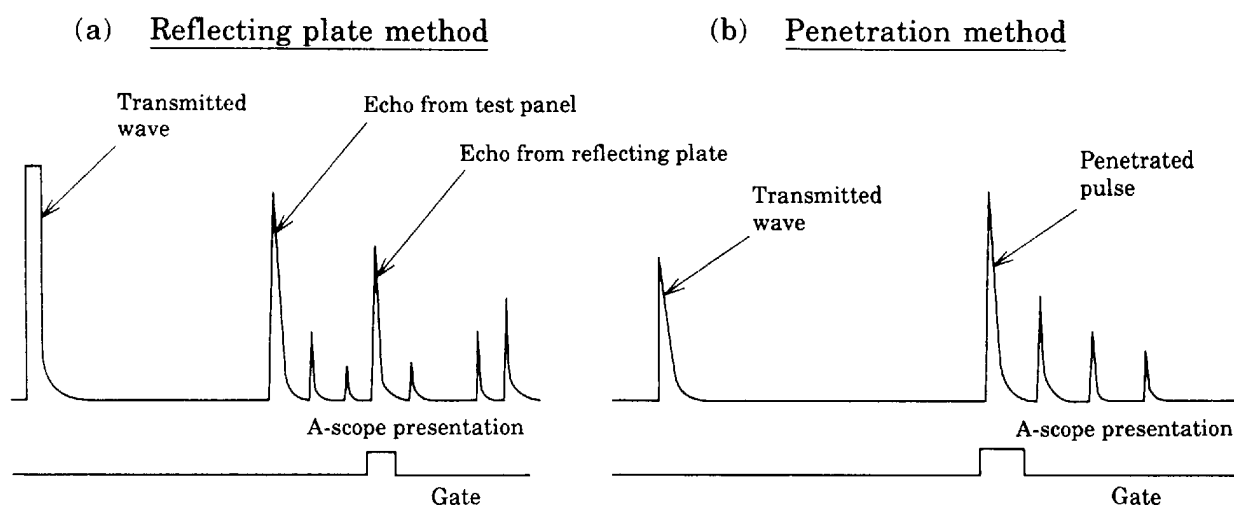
Ultrasonic flaw detecting method for CFRP panel
